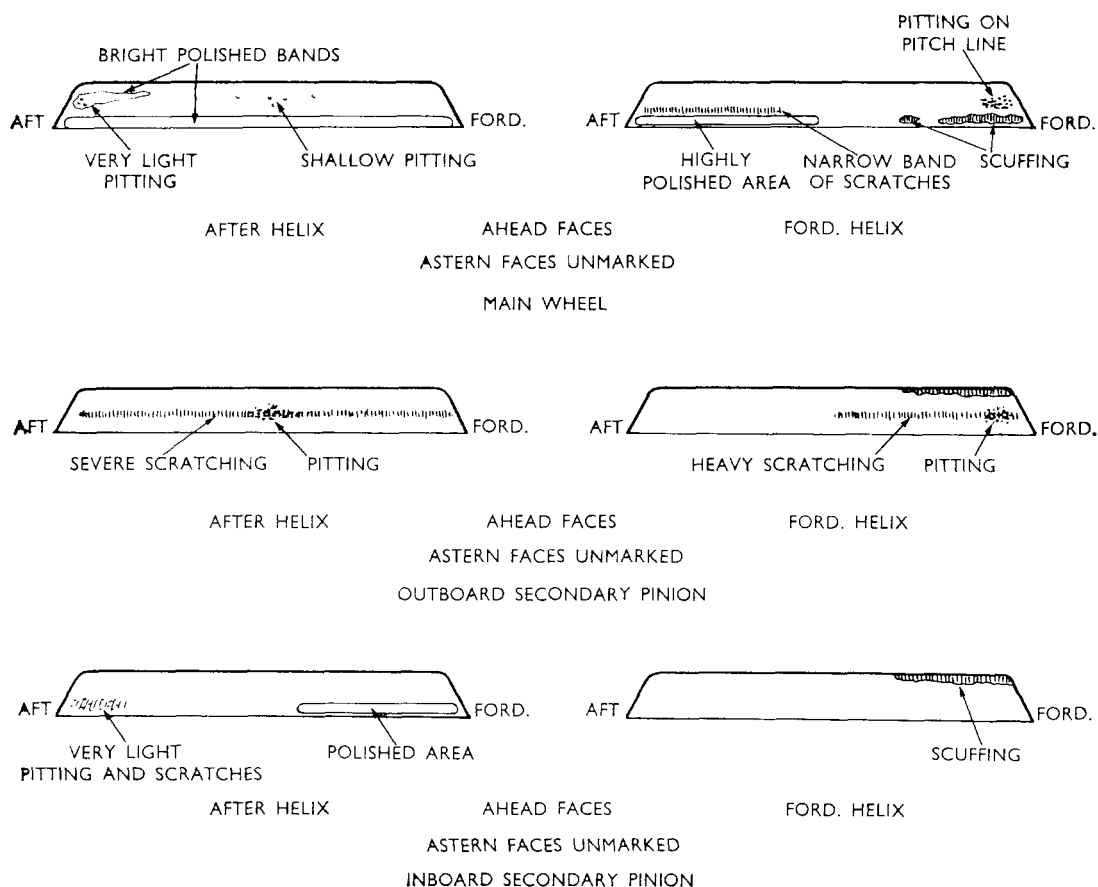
Y.100 GEARS—CONDITION OF SECONDARY GEARS AFTER  $7\frac{1}{2}$  HOURS AT FULL POWER
